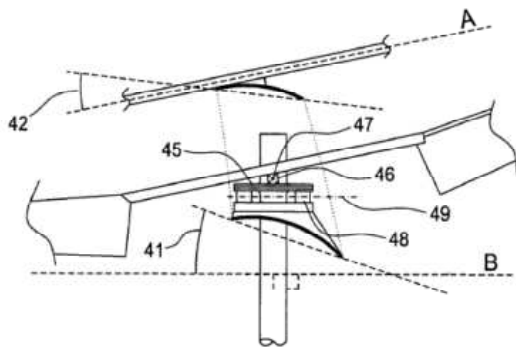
Pitch angles and hinge axis in a tilted rotor [2].
